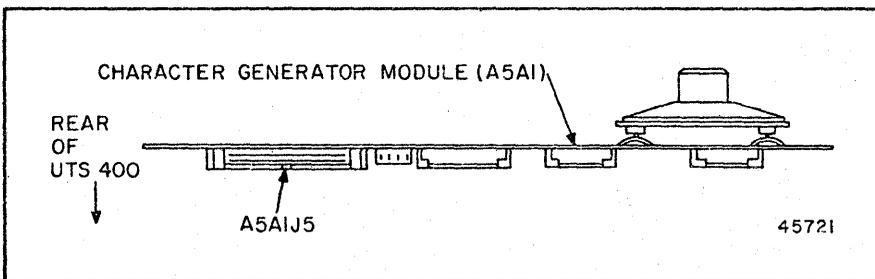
Keyboard Cable Connection - Character Generator Module
